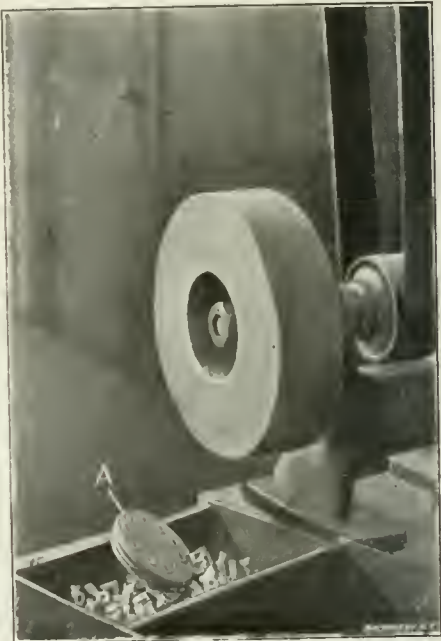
Jig in which Bearings are held while Burrs are being removed by Grinding
